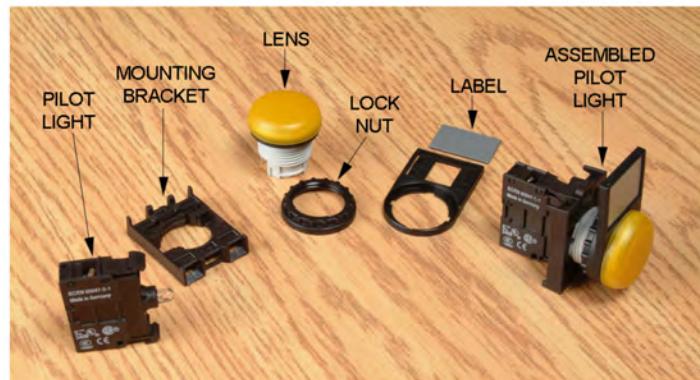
Components required to assemble a typical pilot light, and an assembled pilot light.
